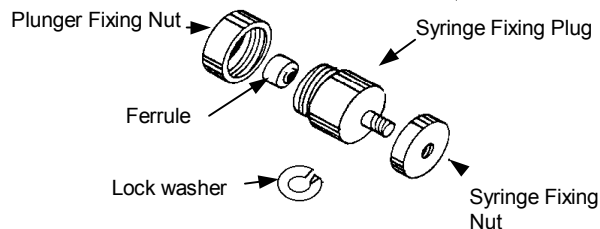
D-30. Syringe Fixture Set (Sample or Diluent)
